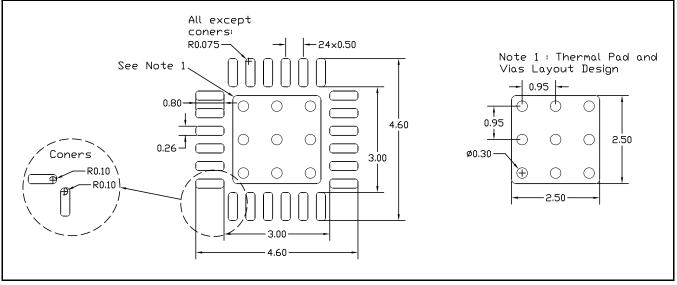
QFN 24L 4.0mm x 4.0mm soldering footprint (NOT TO SCALE)
